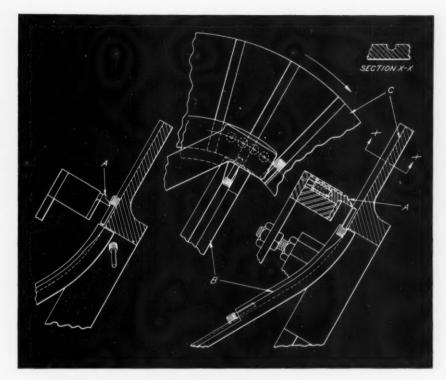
Spring-loaded pressure pins (A) are here employed to insure that shafts enter track (B) with their threaded large-diameter ends leading.
